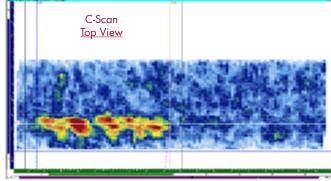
Representative ultrasonic C-Scan of a 28" to 29" OD, 2.0" to 2.5" T_{nom} pipe-to-pipe, with tapered weld surfaces.
